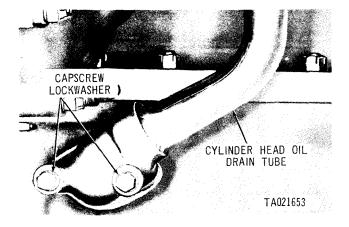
Disconnecting or connecting left rear cylinder head oil drain tube.
